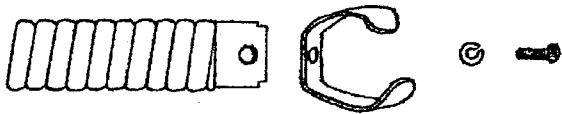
Blade Assembly for  $13/32$ ",  $1/2$ " and  $5/16$ " Cable
